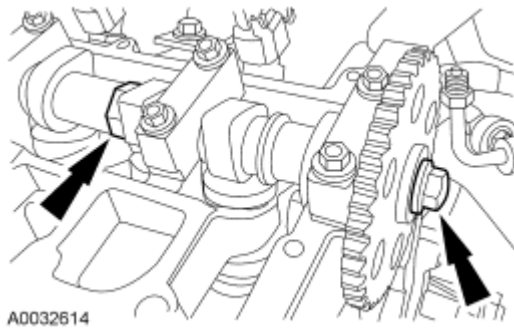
Locating Cam Holding Area And Sprocket Bolt
